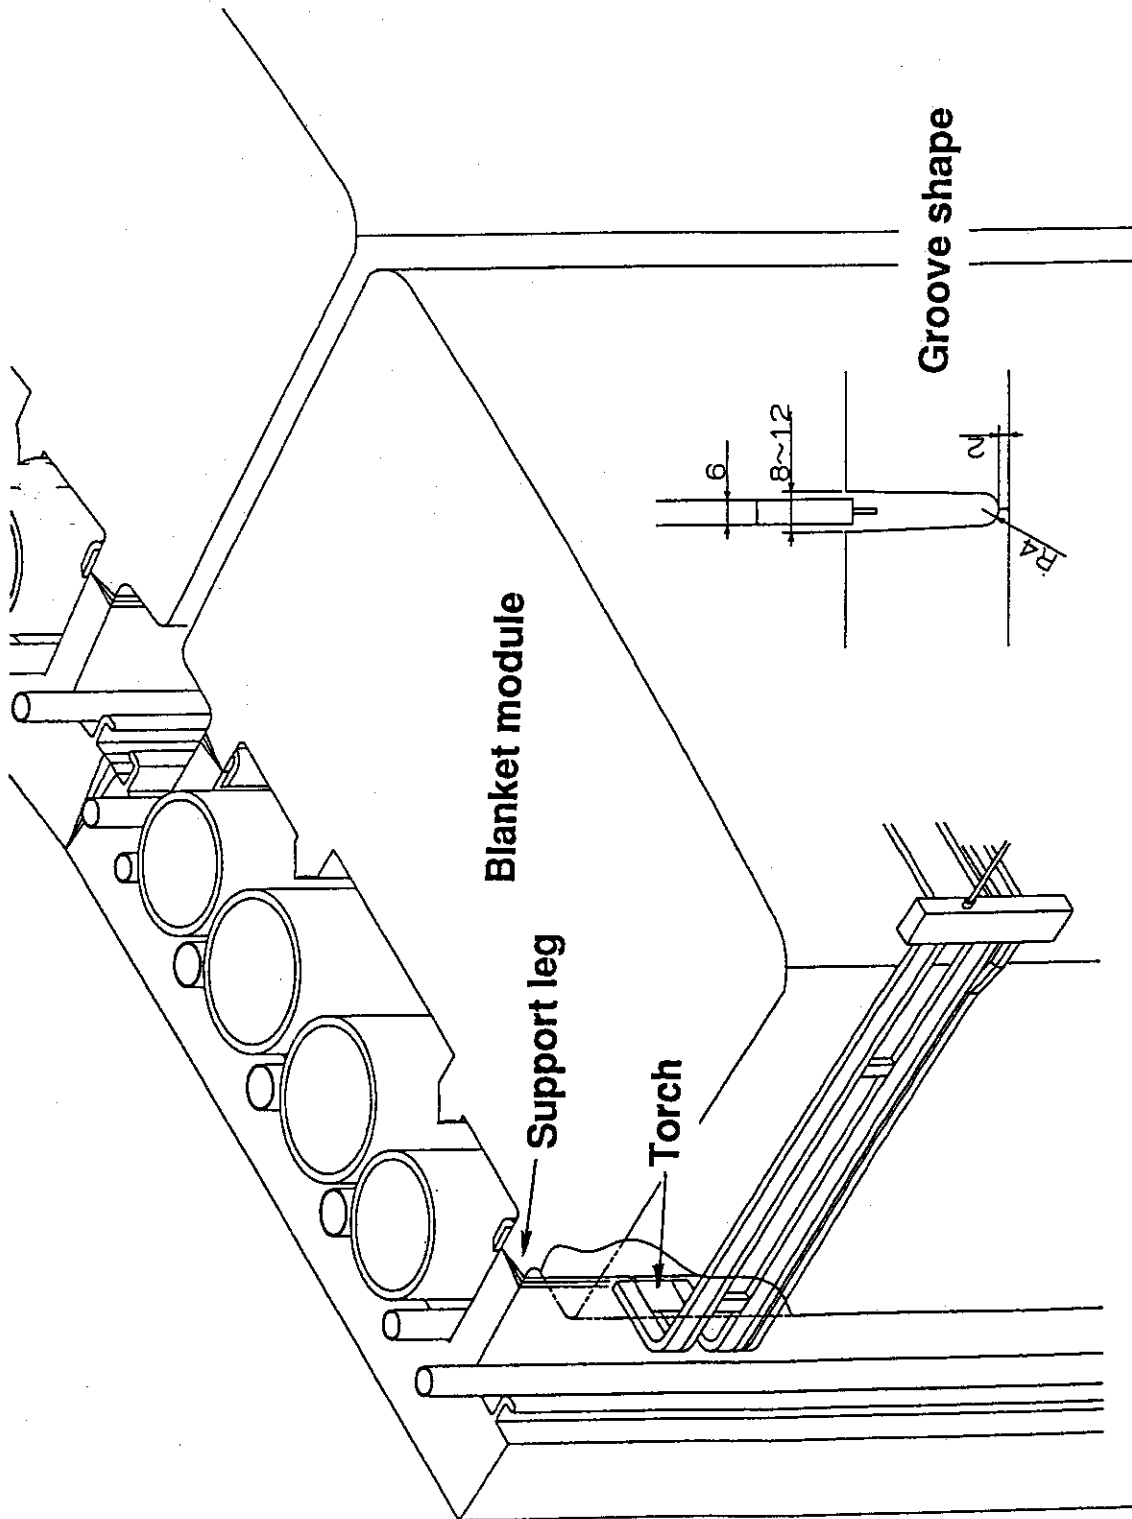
8 Basic concept of narrow gap TIG welding of the support leg of the blanket module.
